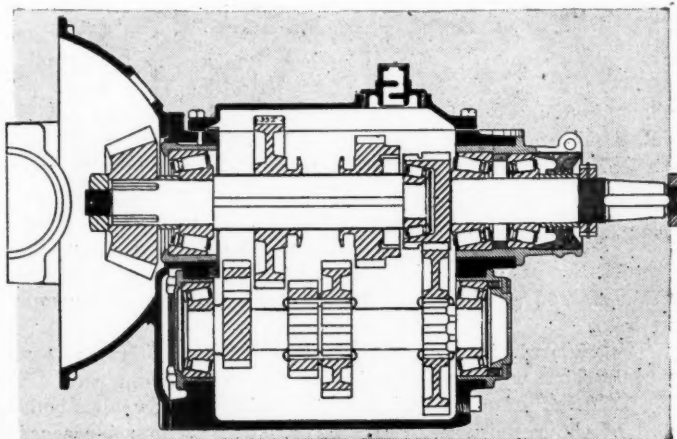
View of Brown-Lipe gearbox as used in connection with Timken jackshaft
